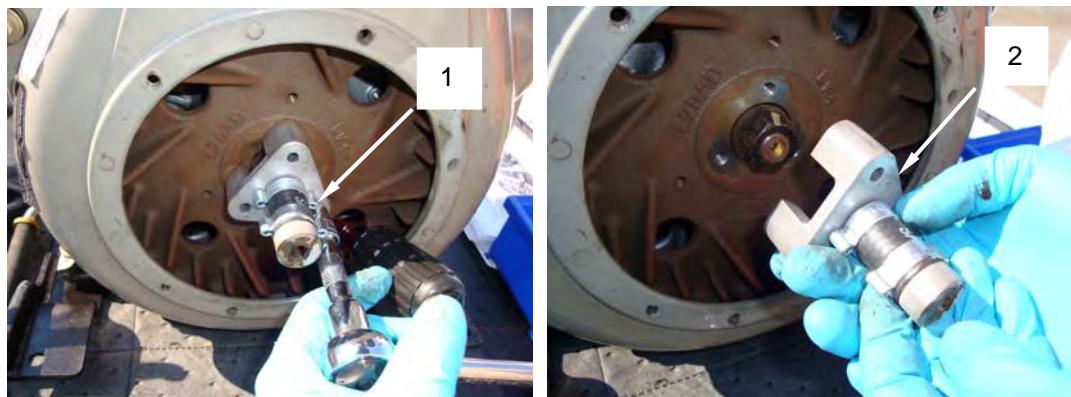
Remove Pump Drive Coupling from Engine Flywheel.
